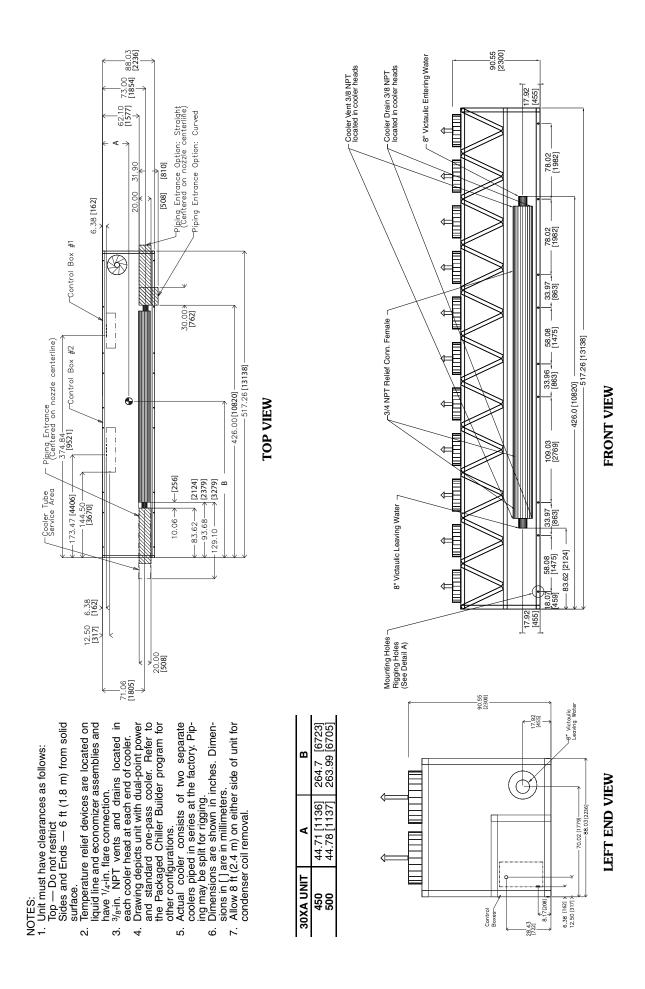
30XA450,500 Air-Cooled Liquid Chiller with Dual Point Connections Dimensions
